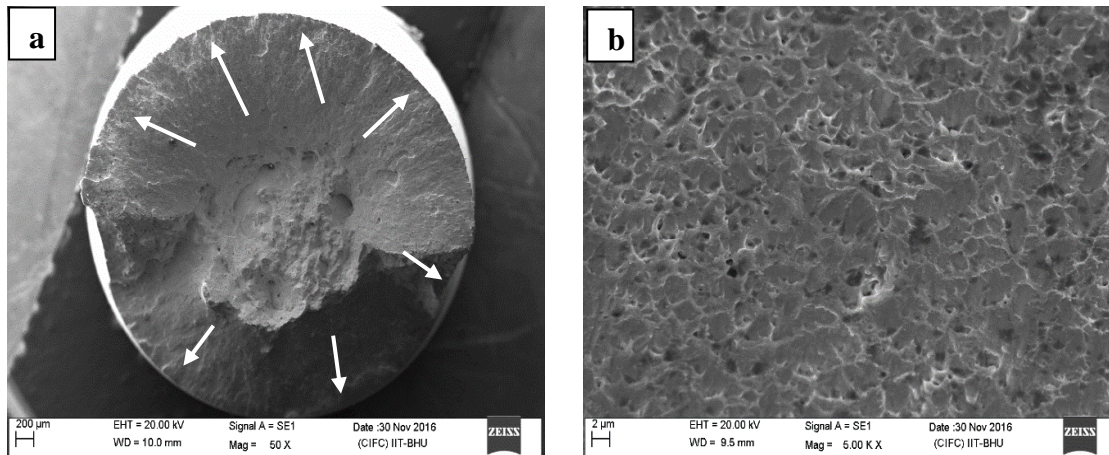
9: Fractographs of the sample fractured at the mean stress of 950 MPa ($R = 0.7$) at 600°C showing: (a) the fracture surface and crack initiation sites, (b) overload fracture showing dimples.
